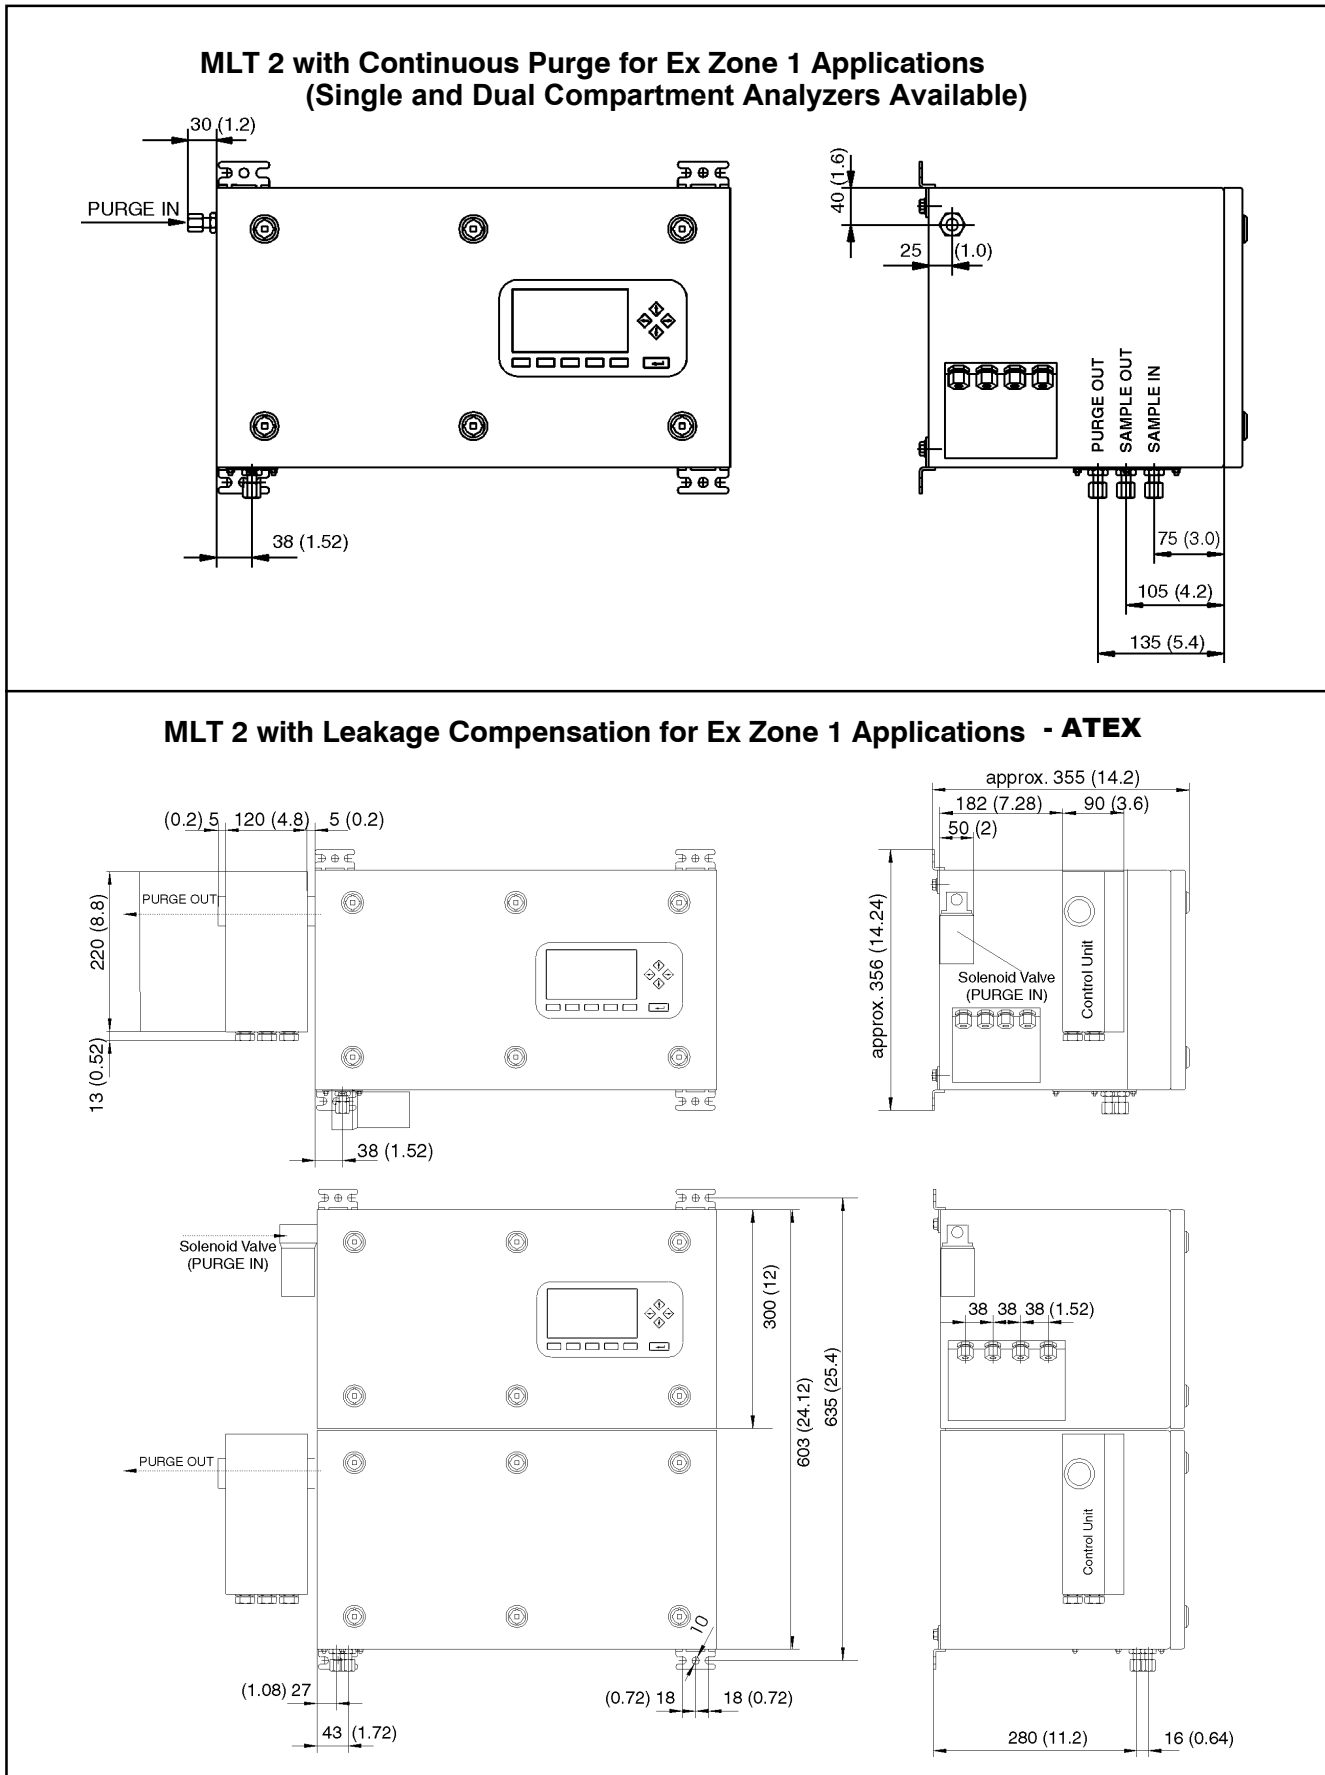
Mounting dimensions: versions of Ex Zone 1. Dimensions in mm (Inches in parentheses).
